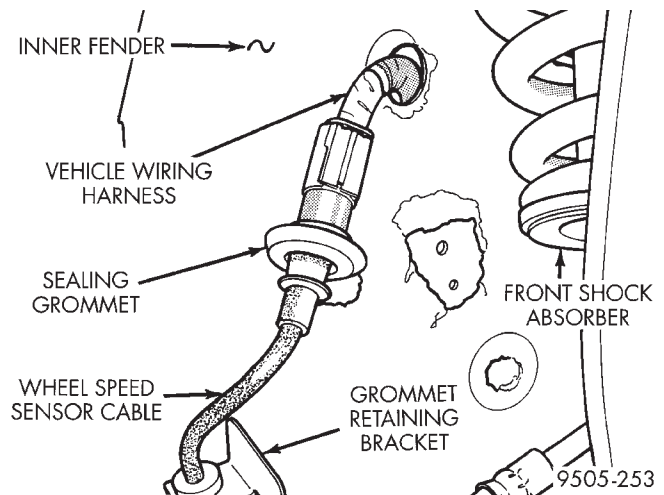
Wheel Speed Sensor Connection To Vehicle Wiring Harness
